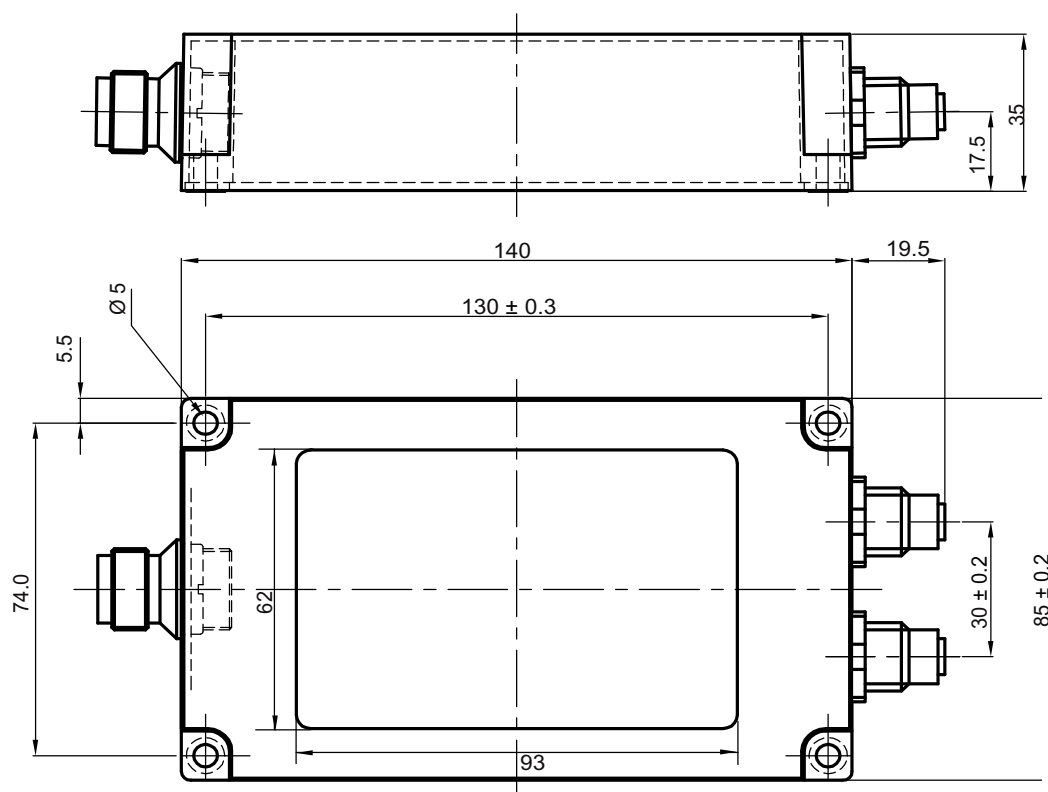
Dimension drawing wide-range power supply unit for SIMATIC RF systems (all dimensions in mm)
